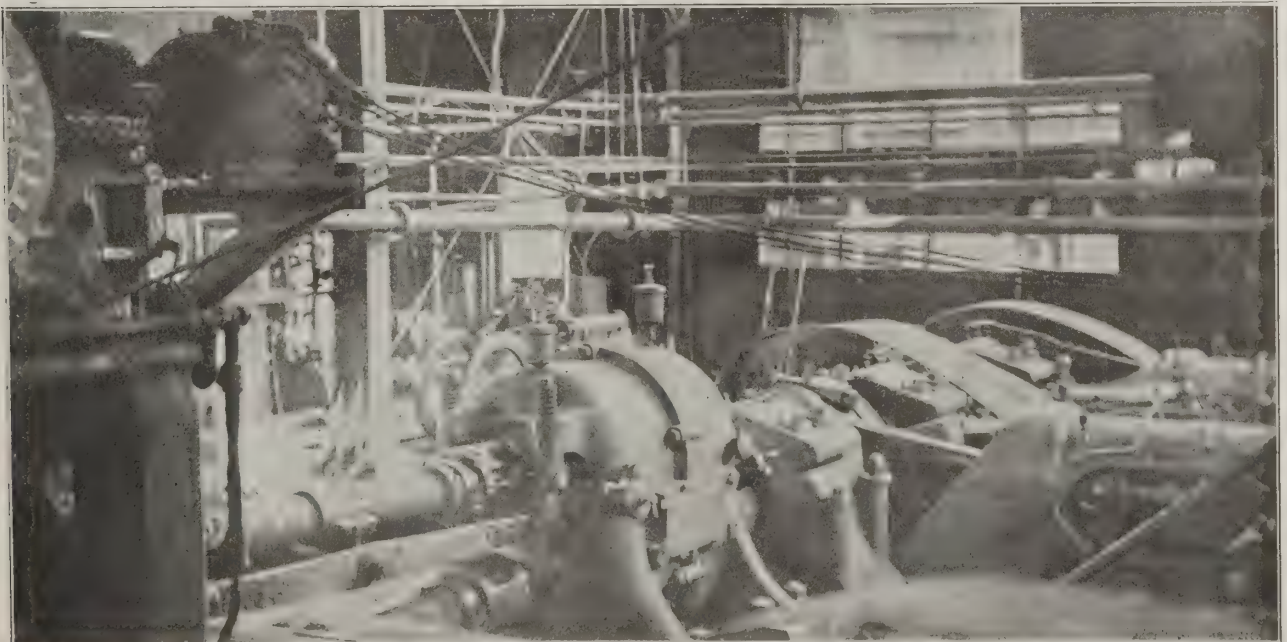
REVERSING ENGINE DIRECT CONNECTED TO TWO ROLL BLOOM MILL.
